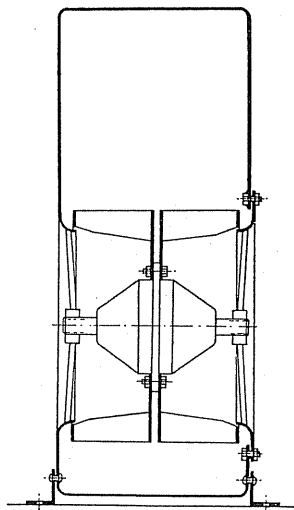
Multivane impeller with external electric rotor fitted inside the hub.
